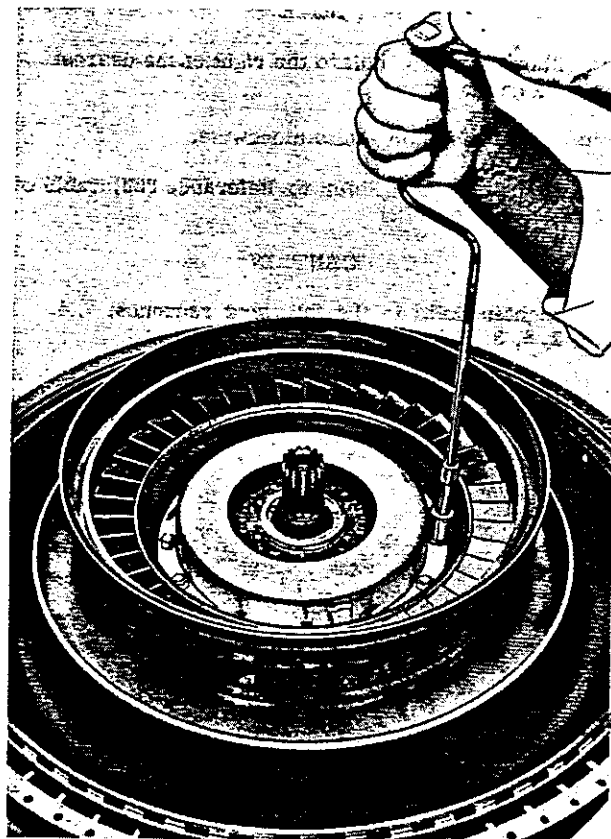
Securing Turbine Cooling Baffle to Turbine Nozzle
